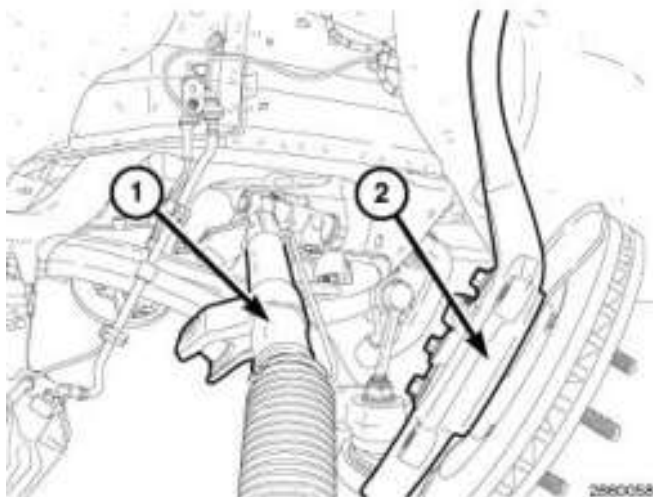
Steering Gear & Knuckle/Rotor Assembly
